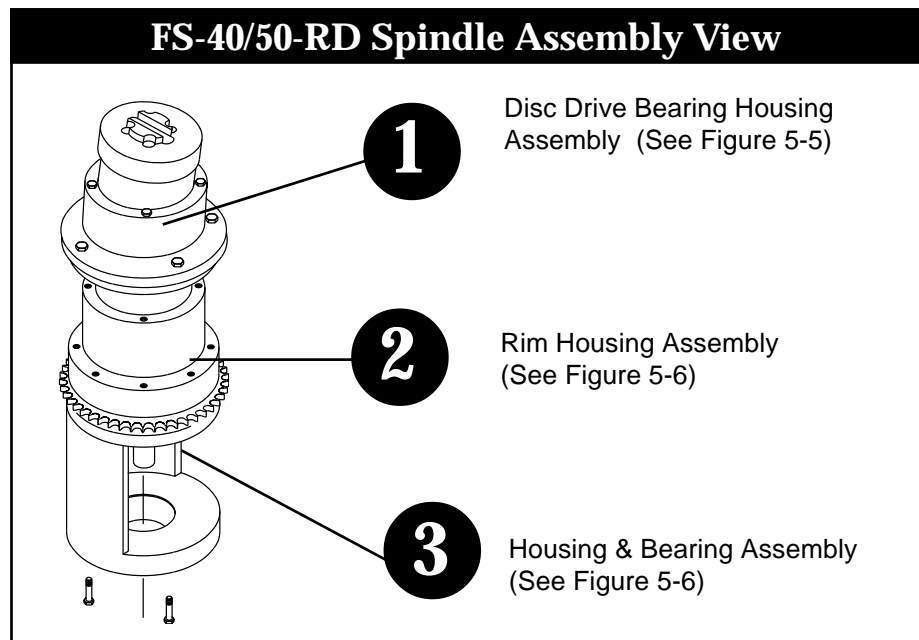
FS-40/50-RD Feeder Spindle Assembly
